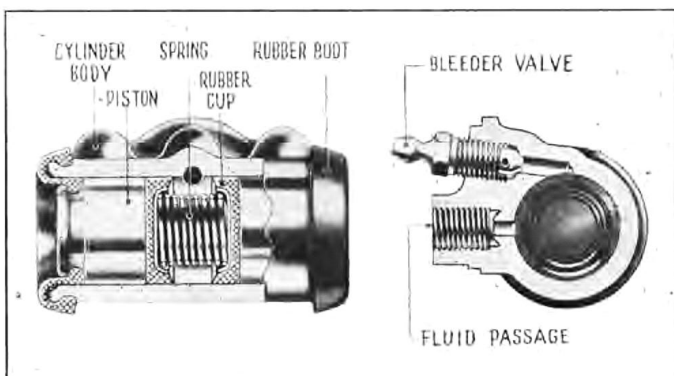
BRAKE OPERATING CYLINDER—FRONT.
